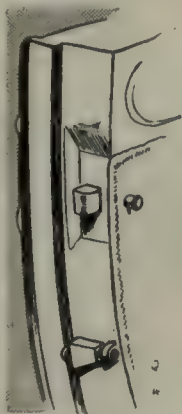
The door locking arrangements of a Penman body. The wedge-shaped piece is adjustable so that rattle may be stopped when wear of the door catch occurs.
